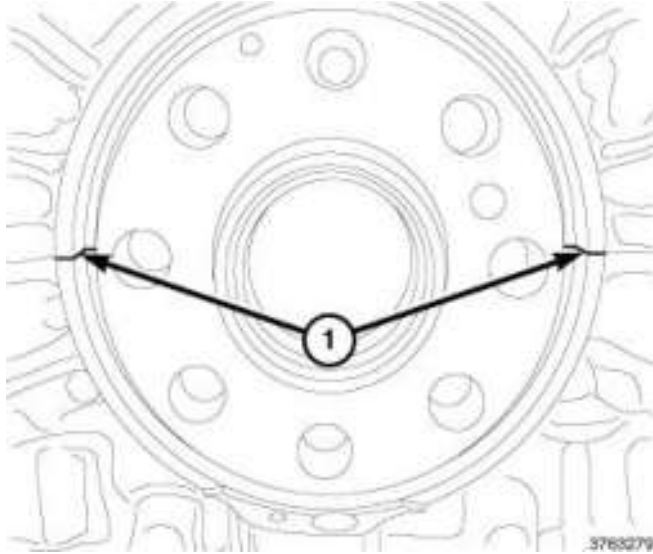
Rear Oil Seal Excess RTV Sealant Locations
